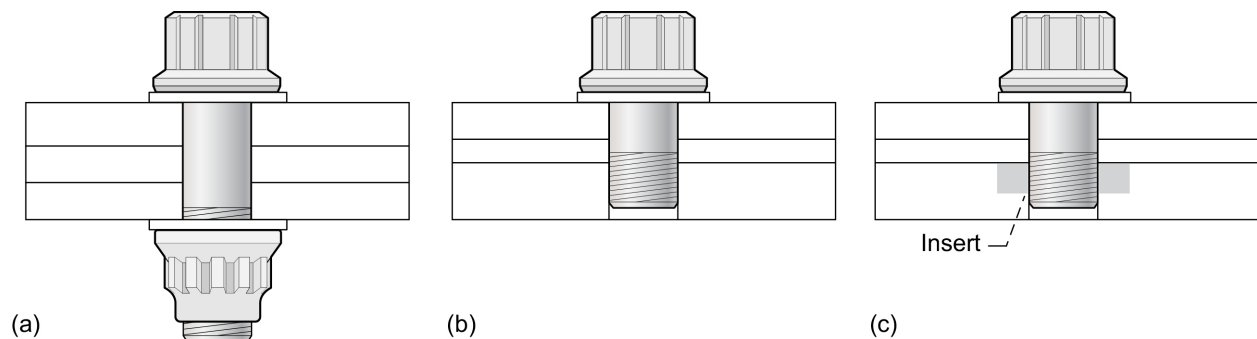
Typical bolted joints. (a) Through-bolted connection. (b) Threaded connection. (c) Insert connection.
